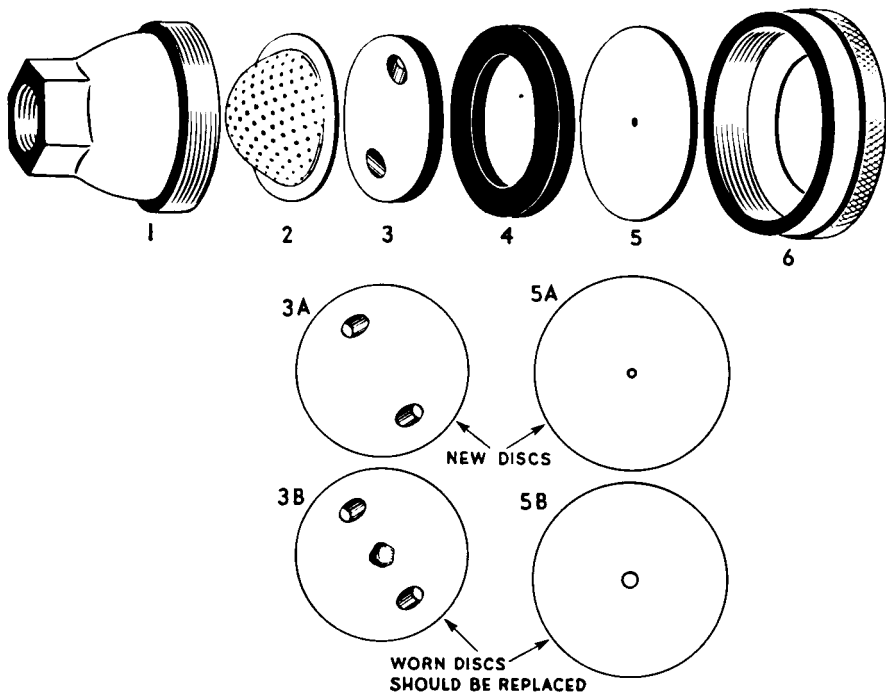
Necessary parts to a spray nozzle: (1) base, (2) strainer, (3) whirl disc, (4) rubber gasket, (5) spray disc, (6) cap. 3A, whirl disc before wear; 3B, whirl disc showing wear in center from gritty material in spray mixture. 5A, spray disc before wear; 5B, spray disc with enlarged hole caused by wear.
